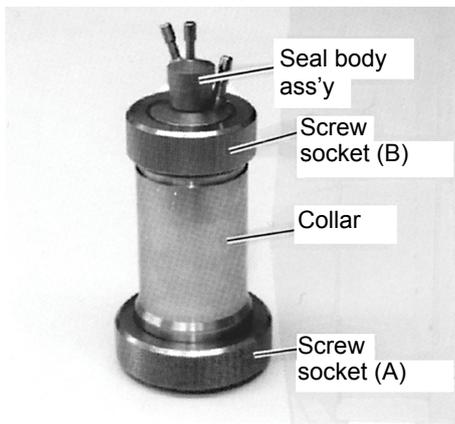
Assembly of seal body Assembly, collar and Screw sockets
